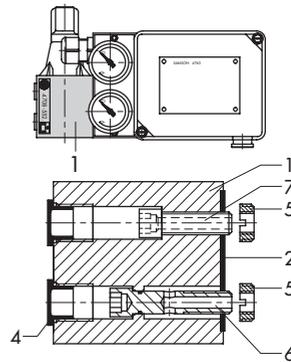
Attachment to Types 4763 and 4735 Positioners
